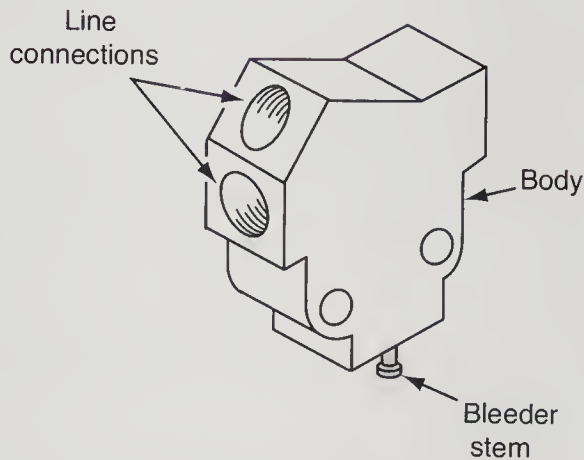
This traditional metering valve slightly delays application of front disc brakes while hydraulic pressure builds up in rear drum brake wheel cylinders.
